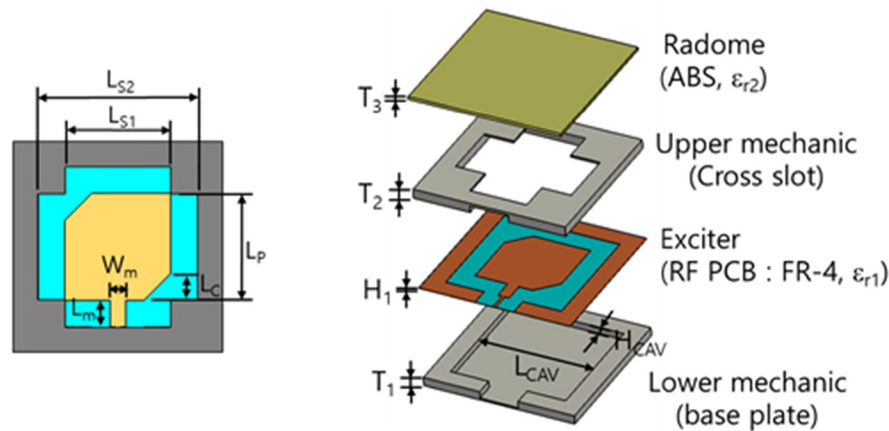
| Design parameters and exploded three-dimensional structure of the unit radiating element.
